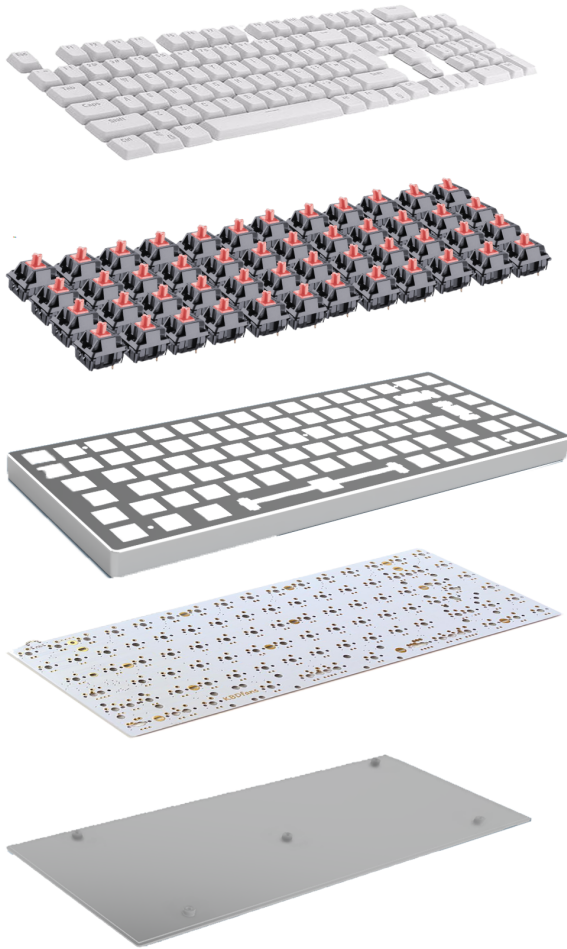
Assembly of the keyboard. From top to bottom: Keycaps, keyswitches, housing, PCB and bottom-lid
